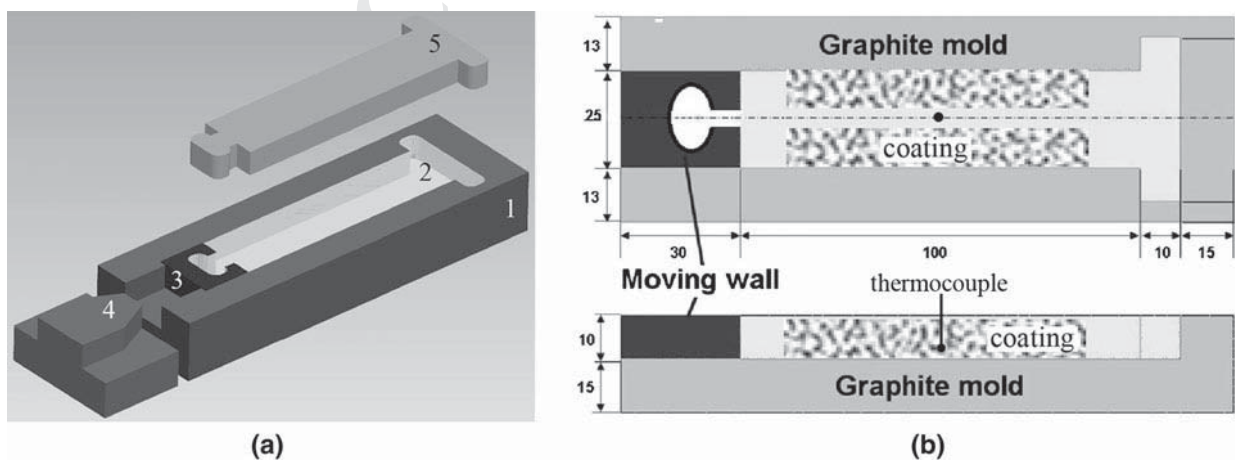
Experimental setup (a): mold (1), cavity (2), moving block (3), displacement sensor (4), and casting/sample (5), and drawing of the mold and coating scheme (b) where dimensions are in mm.
